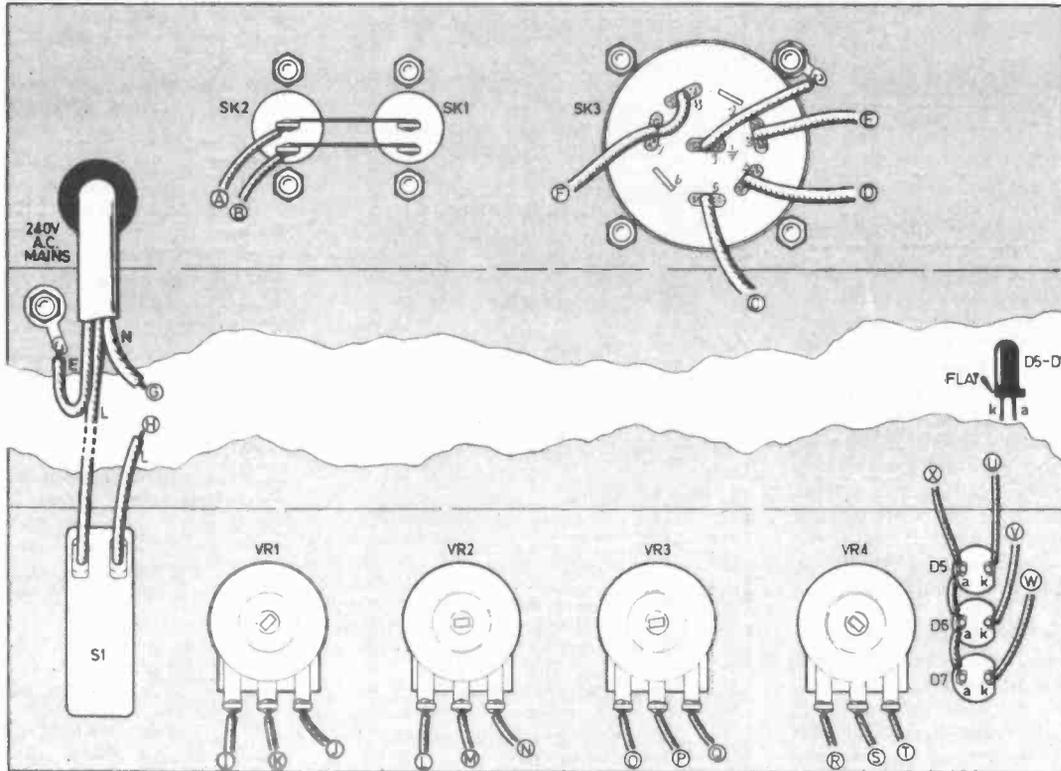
Drawing above shows connections to off-board components. All mains wiring must be with 10A mains cable. Drawing below shows circuit board layout. Note that the anode connection to the thyristors is via the mounting tag. The centre pin connection has been snipped off.
